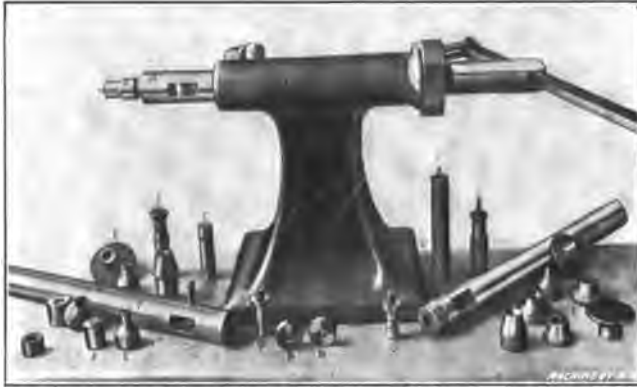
Detailed View of a Spinning-lathe Tailstock
